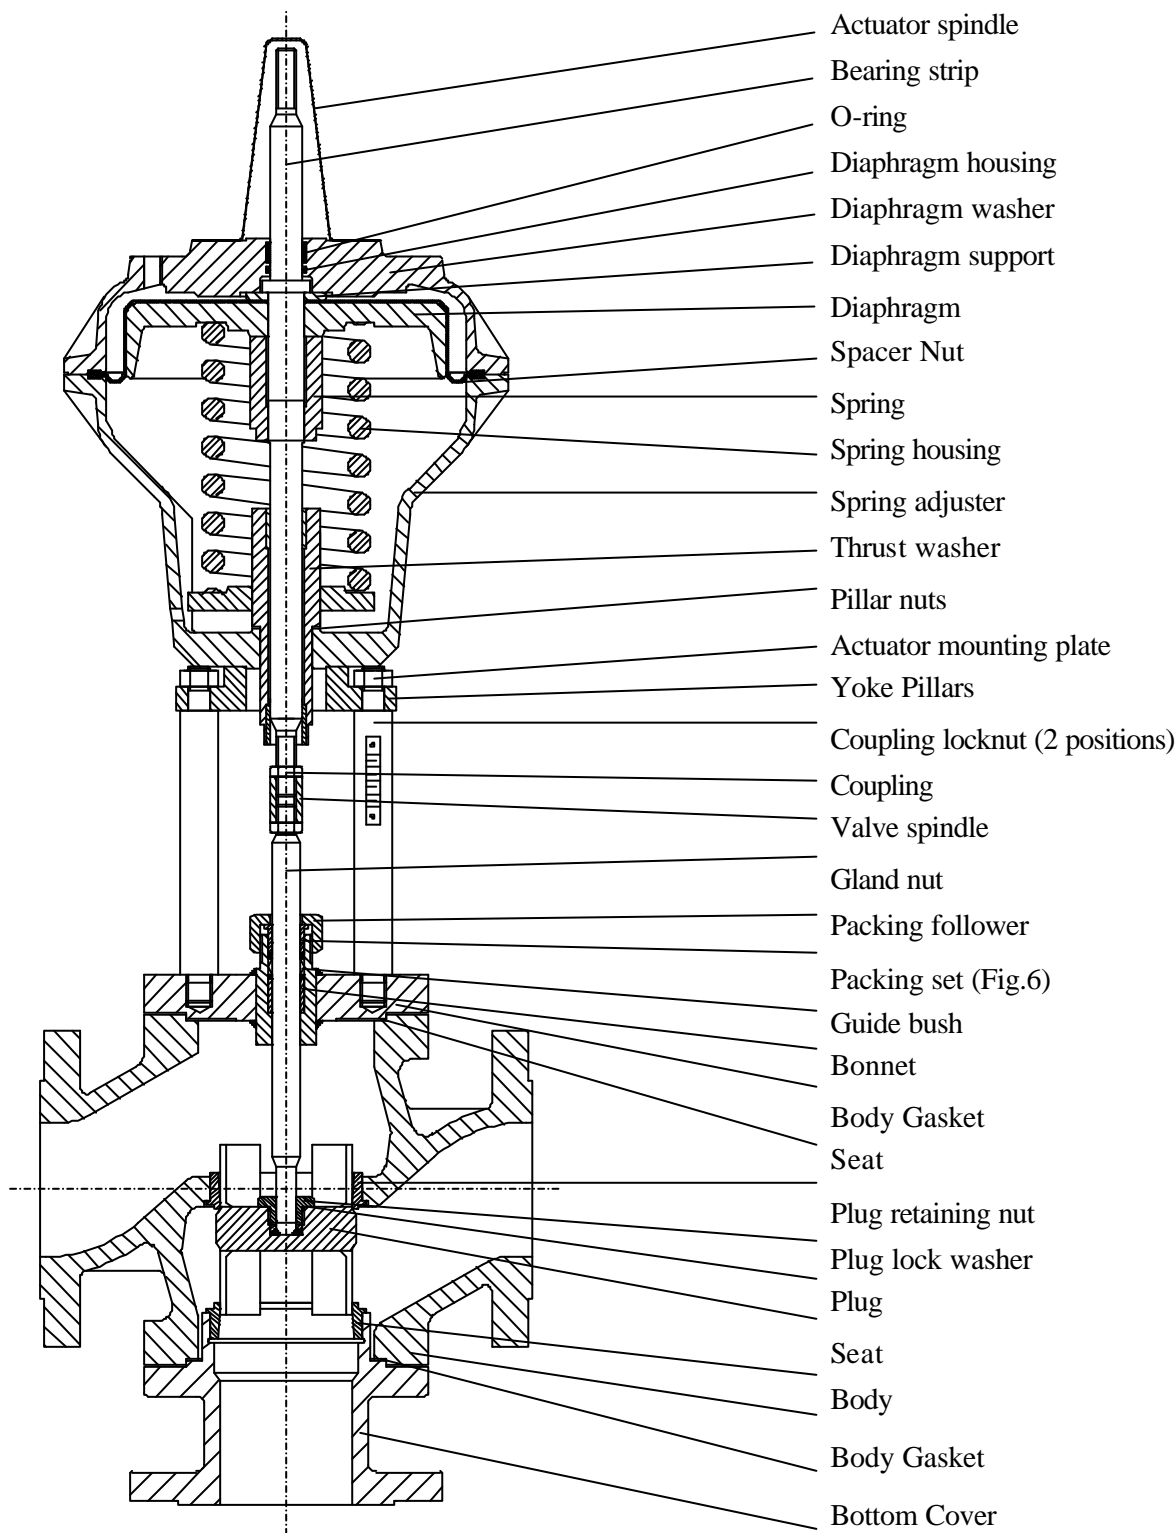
General Arrangement for Figure 680 Fail Bottom Seat Valve
